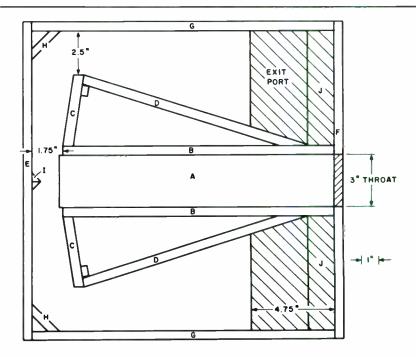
This side view shows the placement of parts and the critical dimensions.
